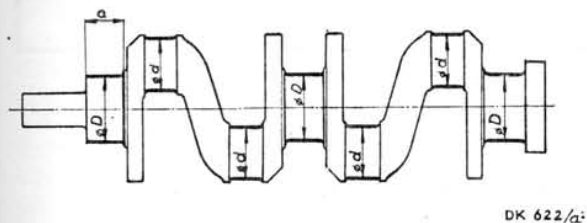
/1 - Reconditioning Crank Journals - the reconditioned surfaces are drawn in heavy lines
